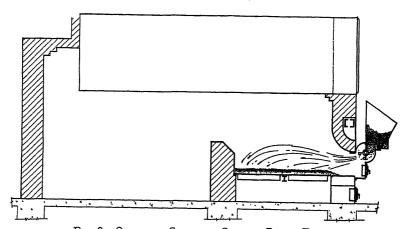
Overfeed Spreader Stoker, Rotor Type
